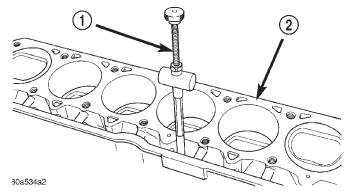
Hydraulic Valve Tappet Removal— Installation Tool
